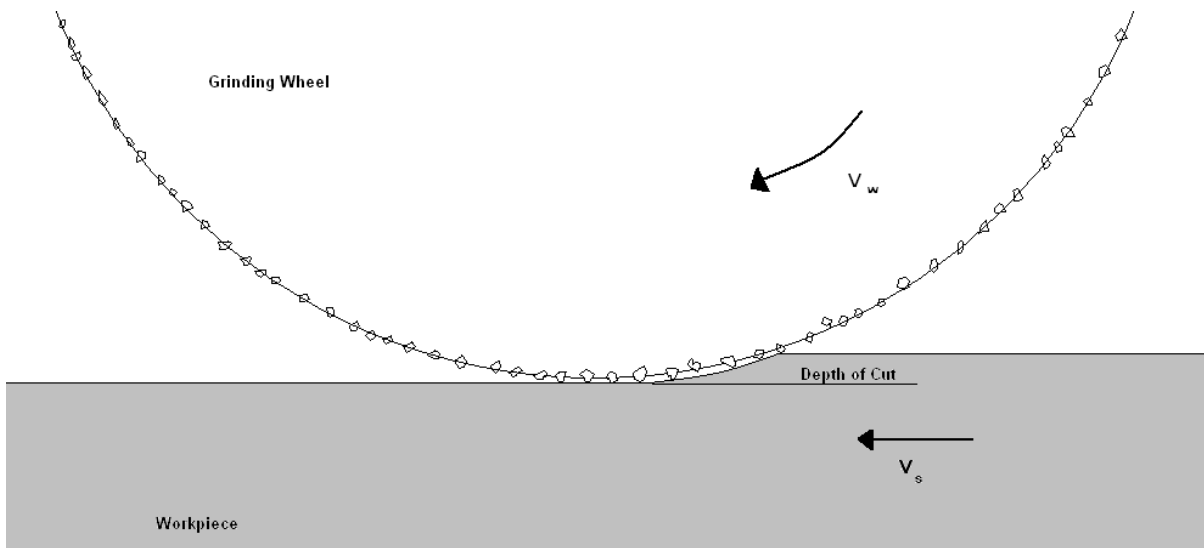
Depiction of the interaction between the grinding wheel and workpiece
